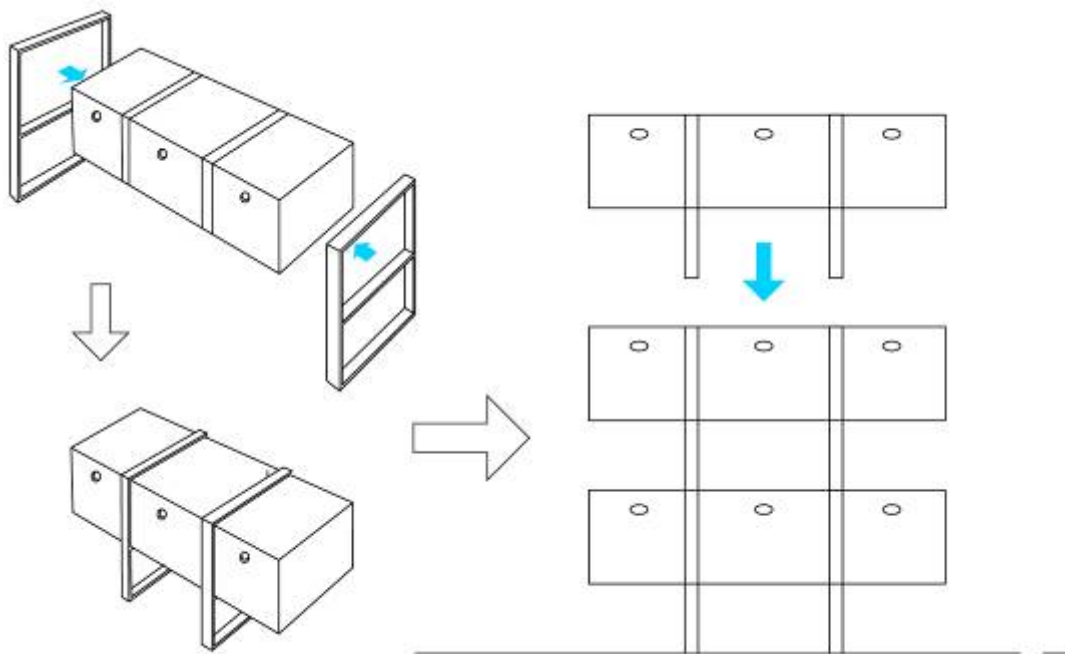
Initial concept sketch 2; the concept involves two frames and a drawer body assembled together, and it is stackable
